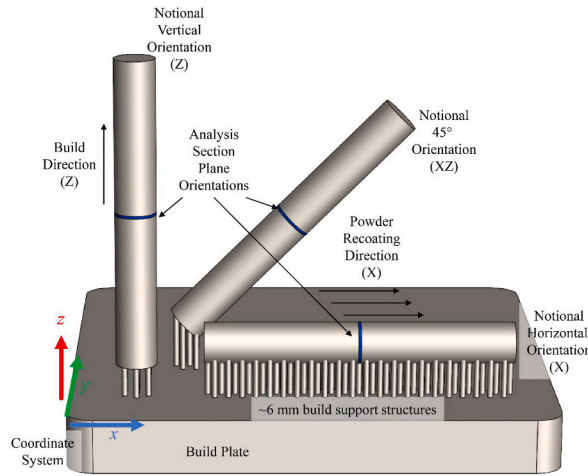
Notional build orientation and build support structures of the tensile test sample blanks with respect to the build plate and build and recoating directions. Horizontal and 45° orientation samples incorporated additional rotation about the z-axis (not shown) to support efficient build processing and recoating (avoiding impacting the compliant recoater blade with multiple leading edges of the build at the same time). Analysis section slices are shown in blue and are perpendicular to the long axis of the build orientation. (For interpretation of the references to colour in this figure legend, the reader is referred to the Web version of this article.)
